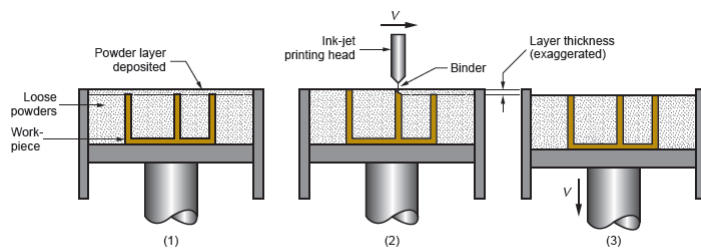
Three-dimensional printing: (1) powder layer is deposited, (2) ink-jet printing of areas that will become the part, and (3) piston is lowered for next layer (key: v = motion).
